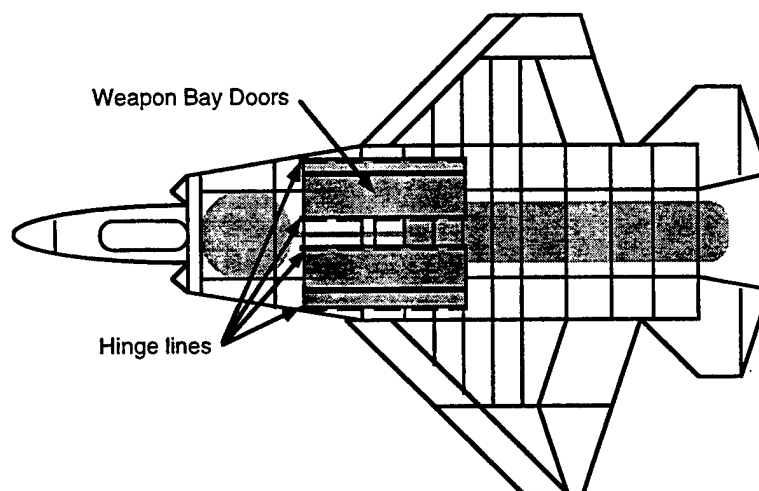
Top view of the JSF airframe showing how weapon bay hinge lines will be supported in an integral design.
